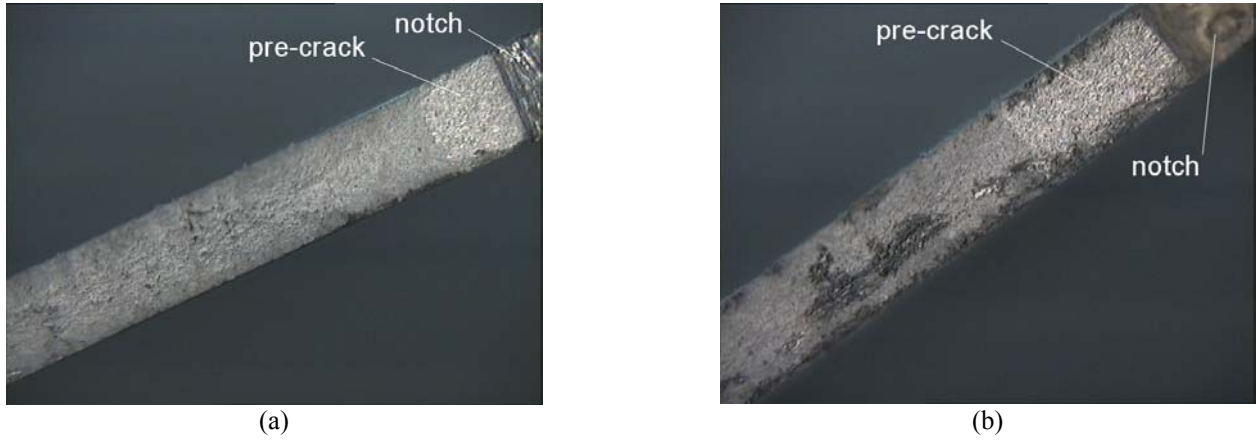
Fracture surfaces of a (a) non-corroded and (b) corroded (EXCO 36 h) fracture toughness specimens
